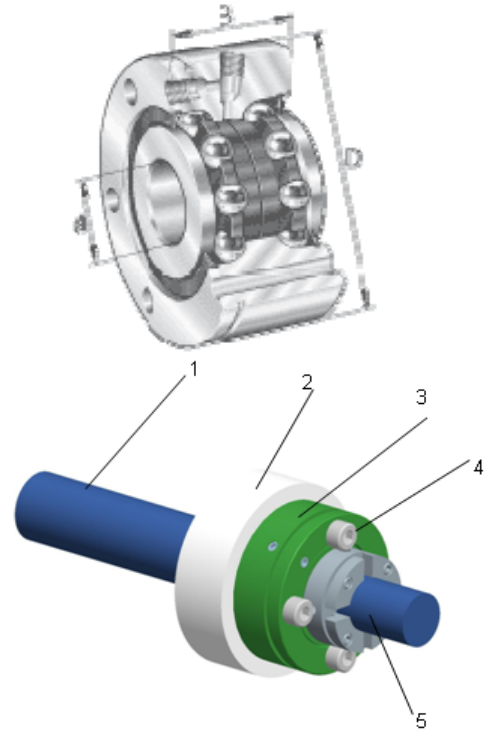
Example of fitting of type INA-Schäffler ZKLF..-2Z bearing: 1 - lead screw; 2 – casing; 3 - type ZKLF..-2Z bearing; 4 - screws for fixing of bearing to the casing; 5 - precise slotted nut (arrangement AM for prestressed bearing)
